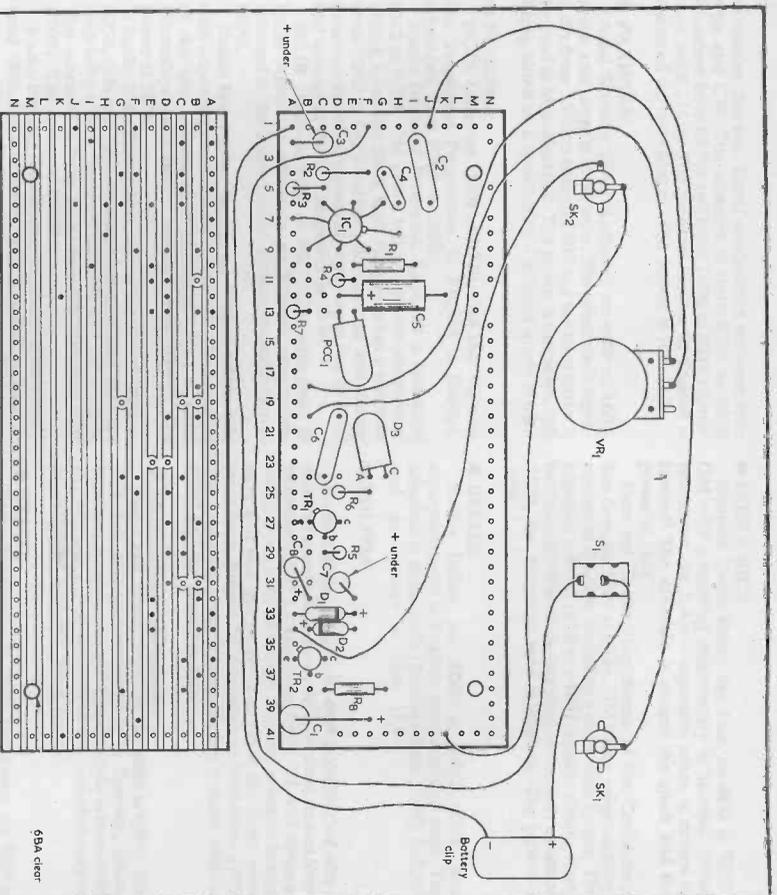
Apart from the battery and the front panel components, all the parts are assembled on a Veroboard panel. IC1 should be soldered into circuit with an iron having a reliably earthed bit.
